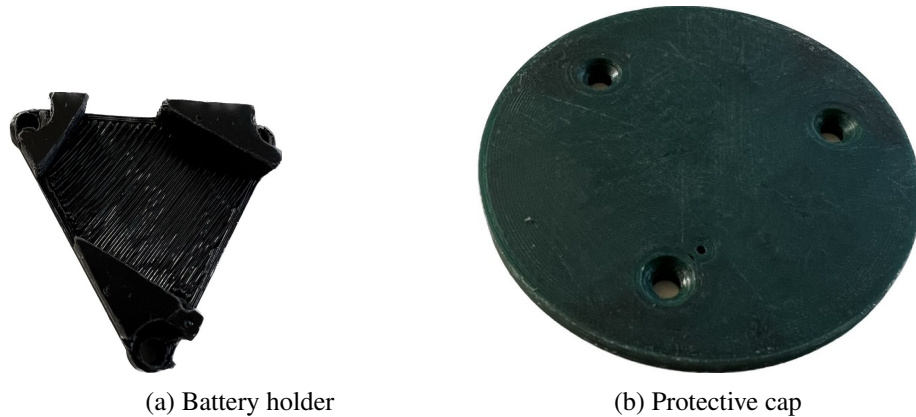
The 3-D printed parts for the sensor system integration into the hockey puck.
